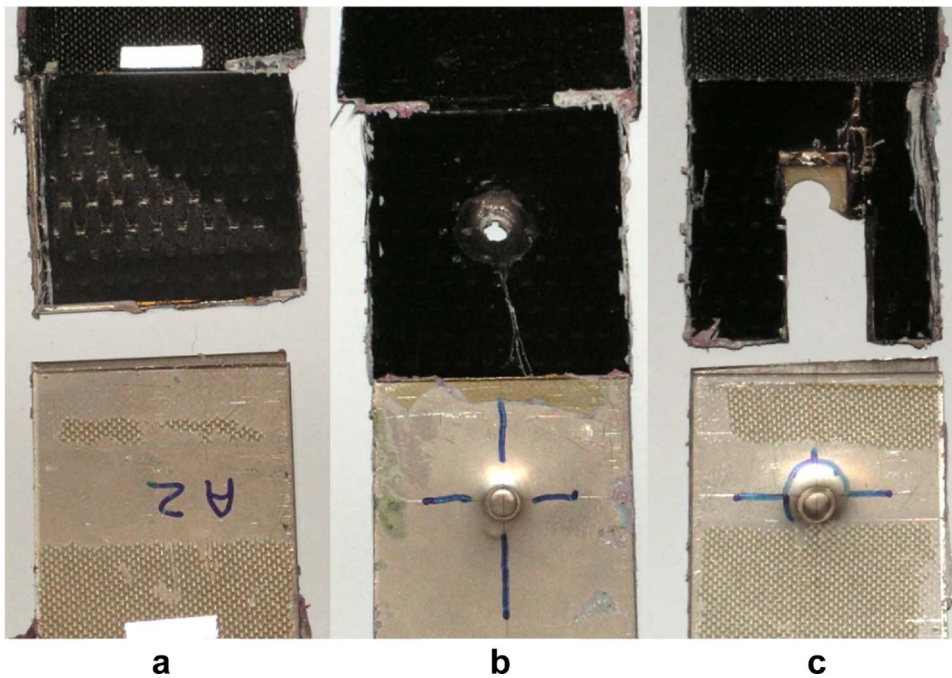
Photographs of typical joint failure for the: (a) adhesive joint; (b) weld (fibres); (c) weld (no fibres).
